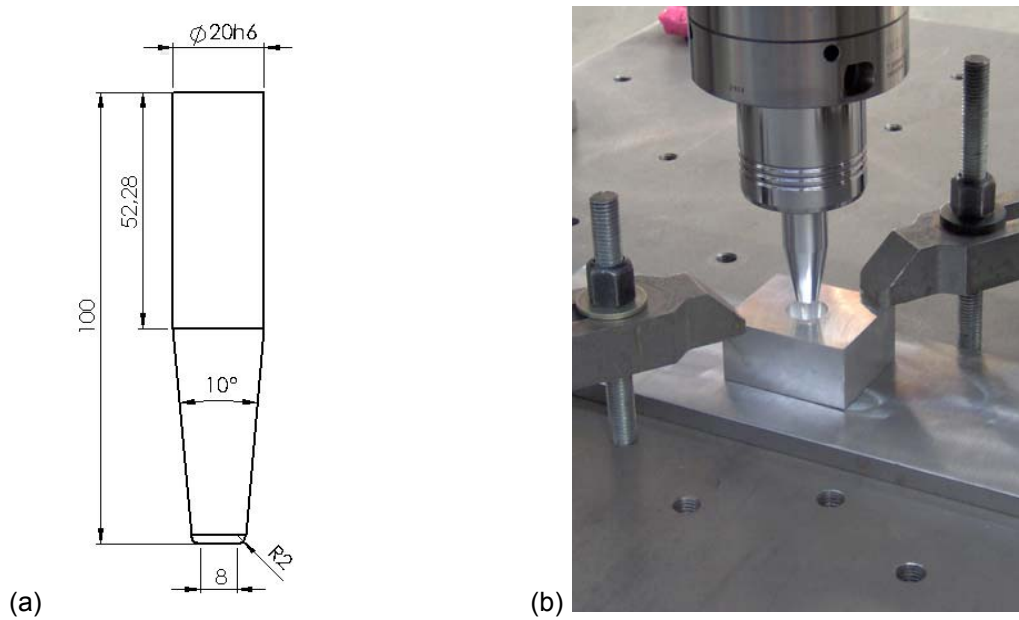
In (a) the configuration of the tapered stud and in (b) the stud clamped on the welding head before the welding.
